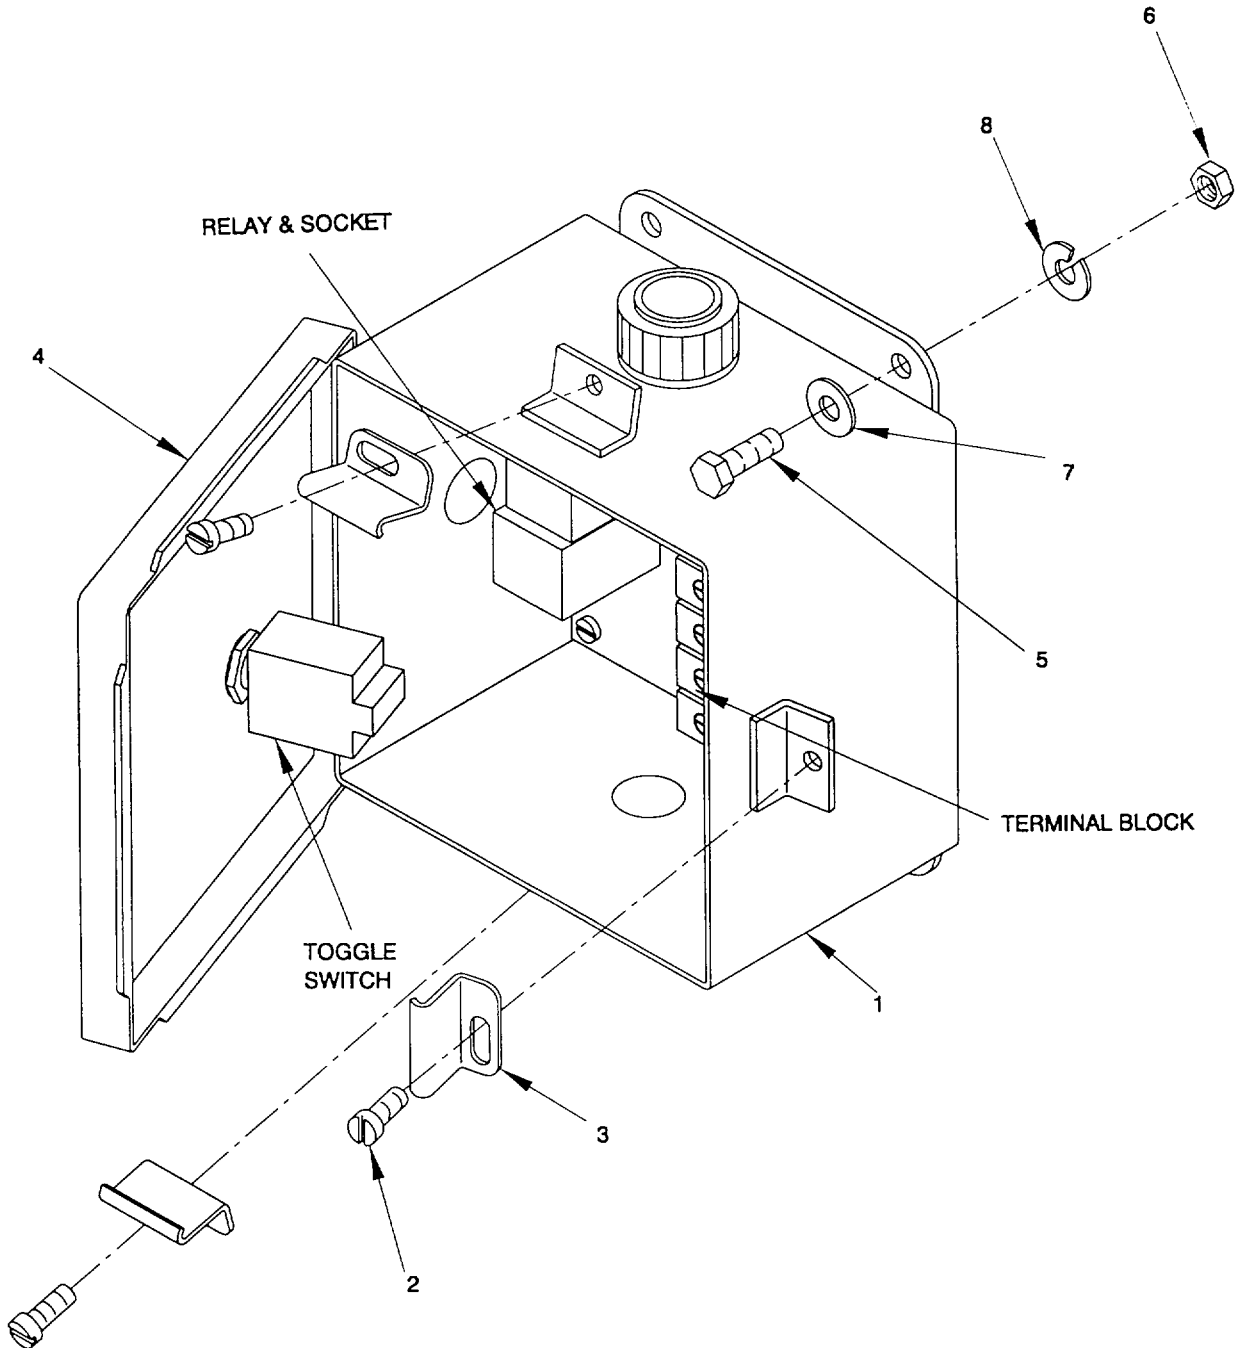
Single Bilge Pump Control Assembly, Remove/Install
